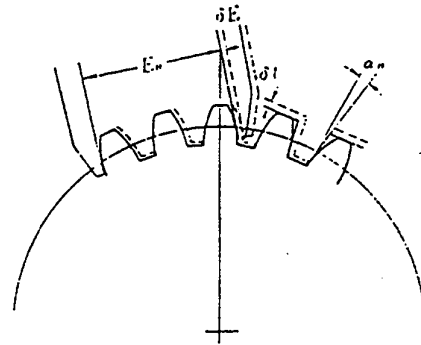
Tooth thickness measurement to determine additional cutting depth
